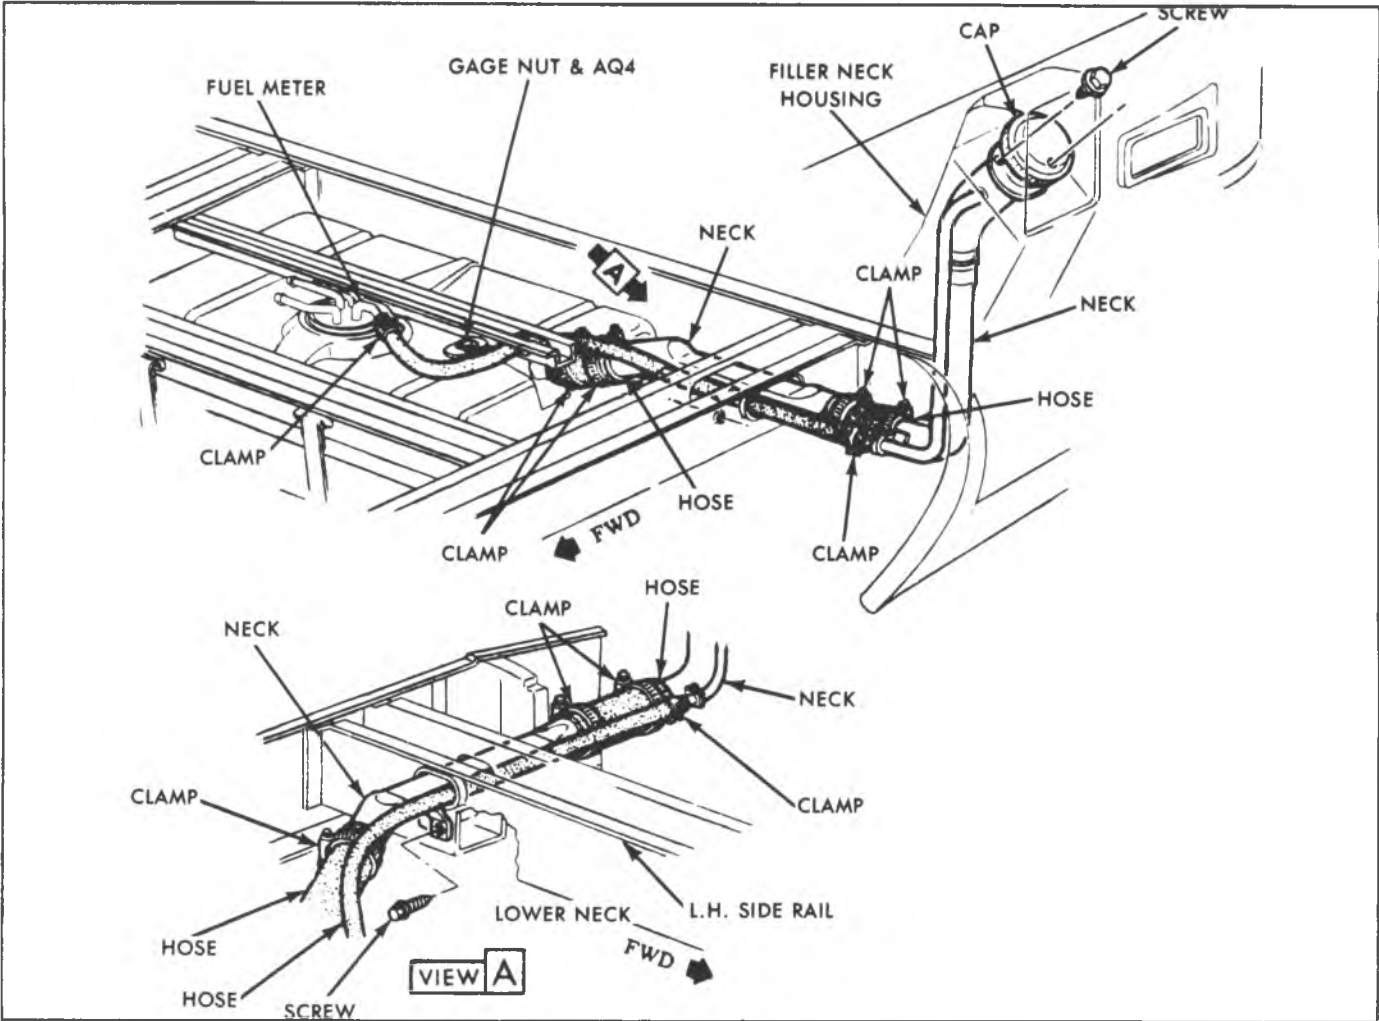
C5-14-Fuel Tank and Filler Neck G Van
